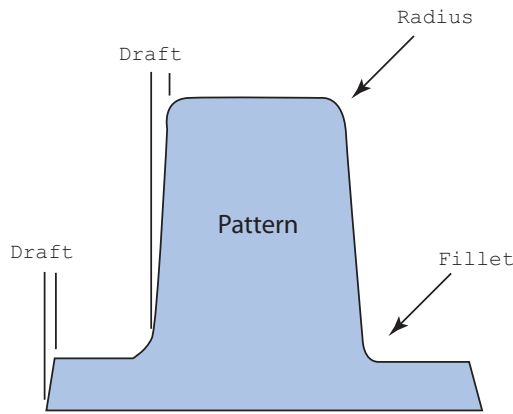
This drawing shows three of the tools—draft, fillet and radius—that patternmakers arm themselves with to improve the casting manufacturing process.
